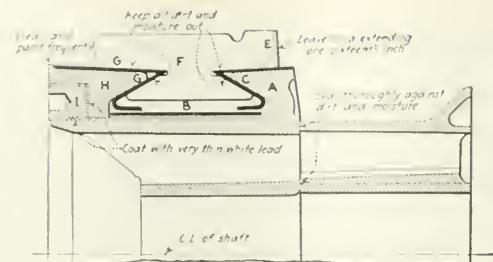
SECTION OF COMMUTATOR WITH PARTS ASSEMBLED
